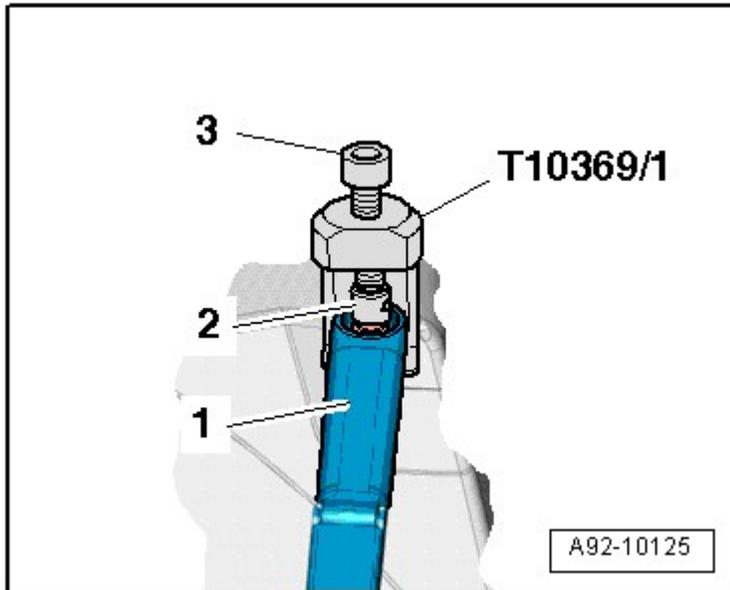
Removing Windshield Wiper Arm With Puller T10369/1
